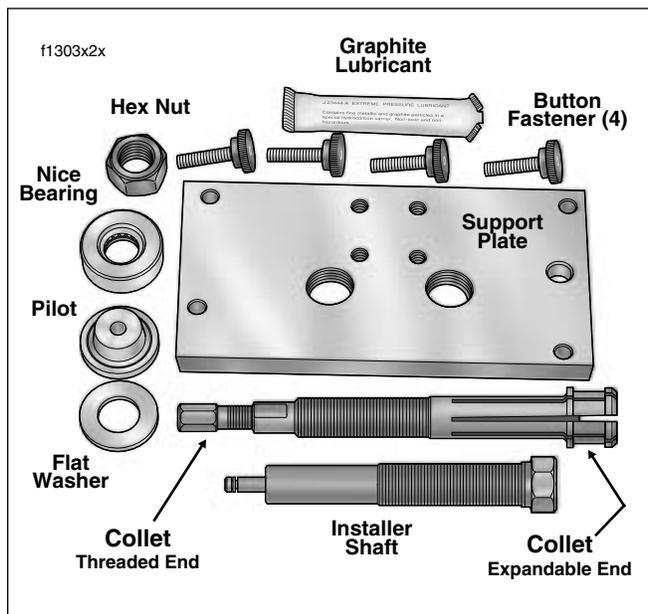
Camshaft Needle Bearing Remover/Installer (HD-42325A)
